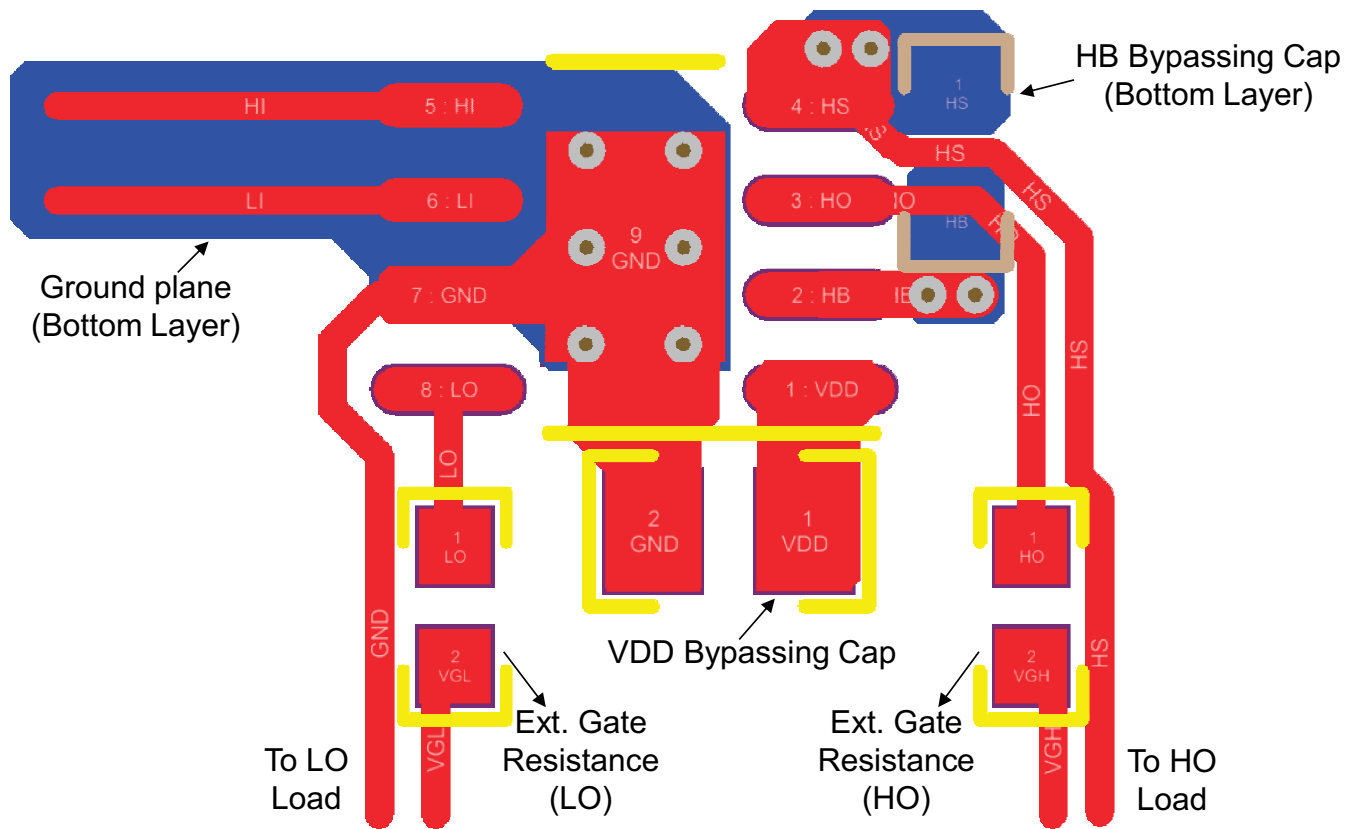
UCC27301A PCB Layout Example for SOIC package
